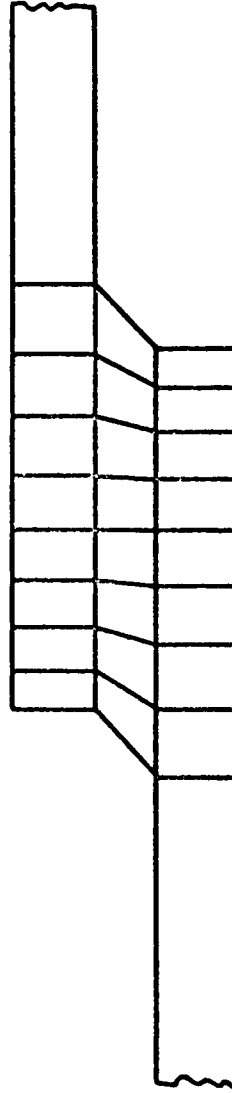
Typical Adhesive Bonded Lap-Type Joint¹³
